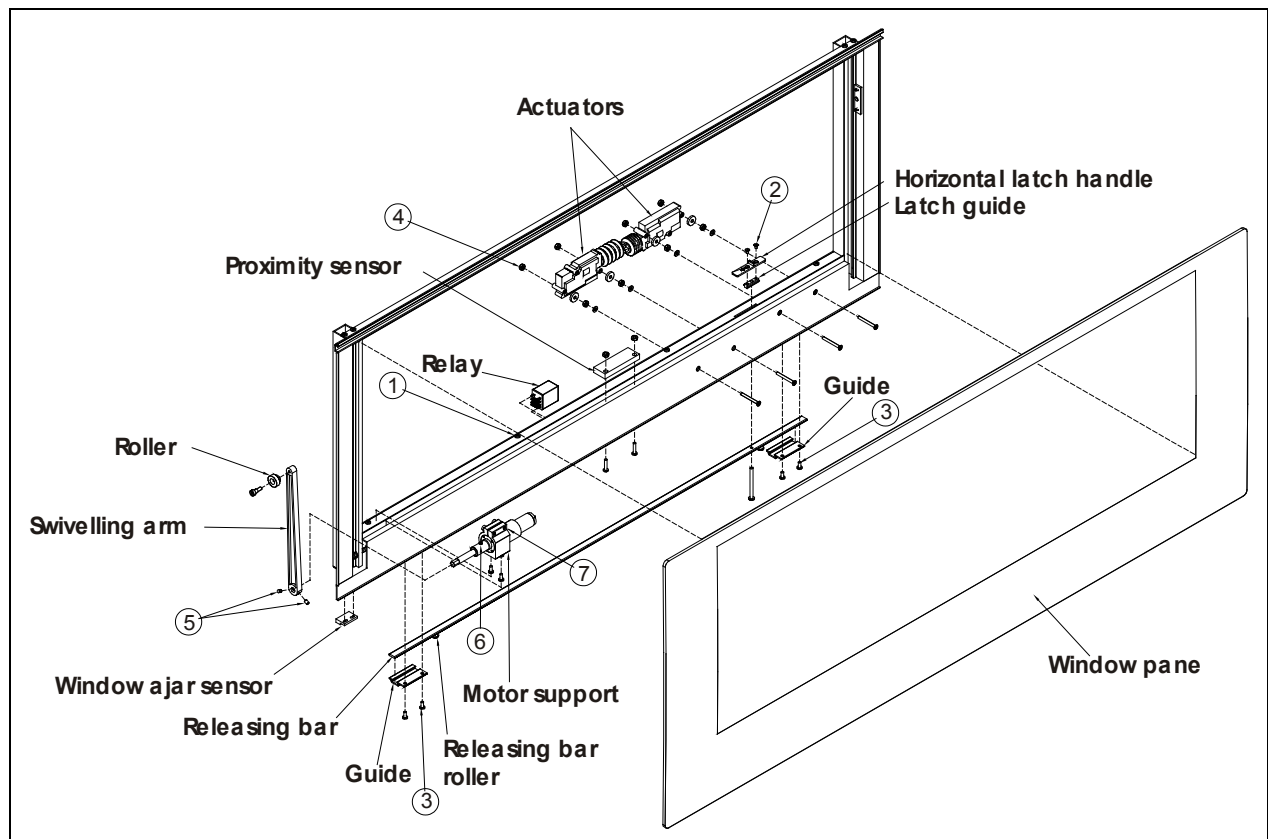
ELECTRIC AWNING WINDOW EXPLODED VIEW (SASH)
